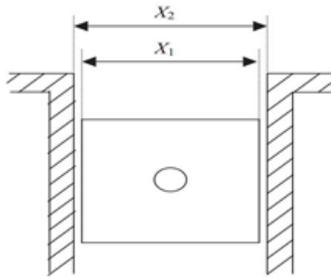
A piston-cylinder bore assembly where, X1 is the piston diameter, X2 is the cylinder bore diameter and Y is the diametric clearance (assembly dimension)[8]
